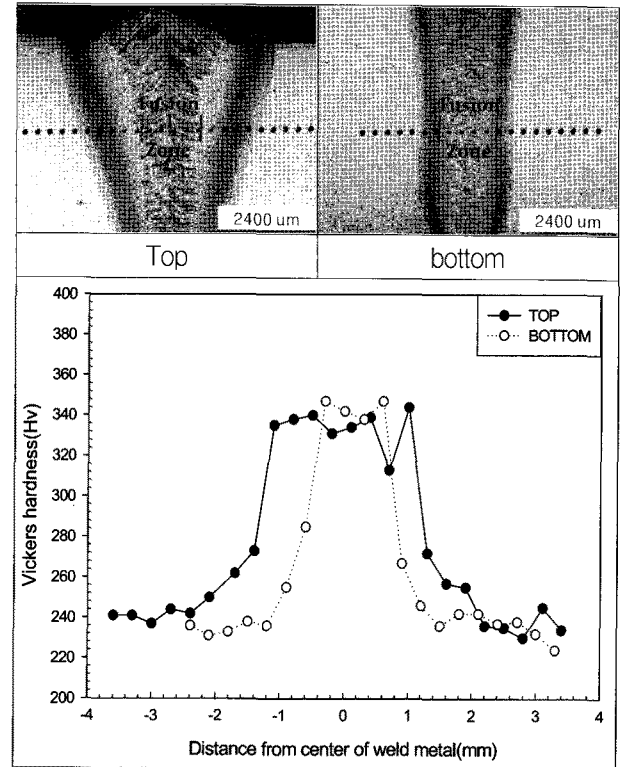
Hardness and macrostructures of weld metal after fiber laser welding
